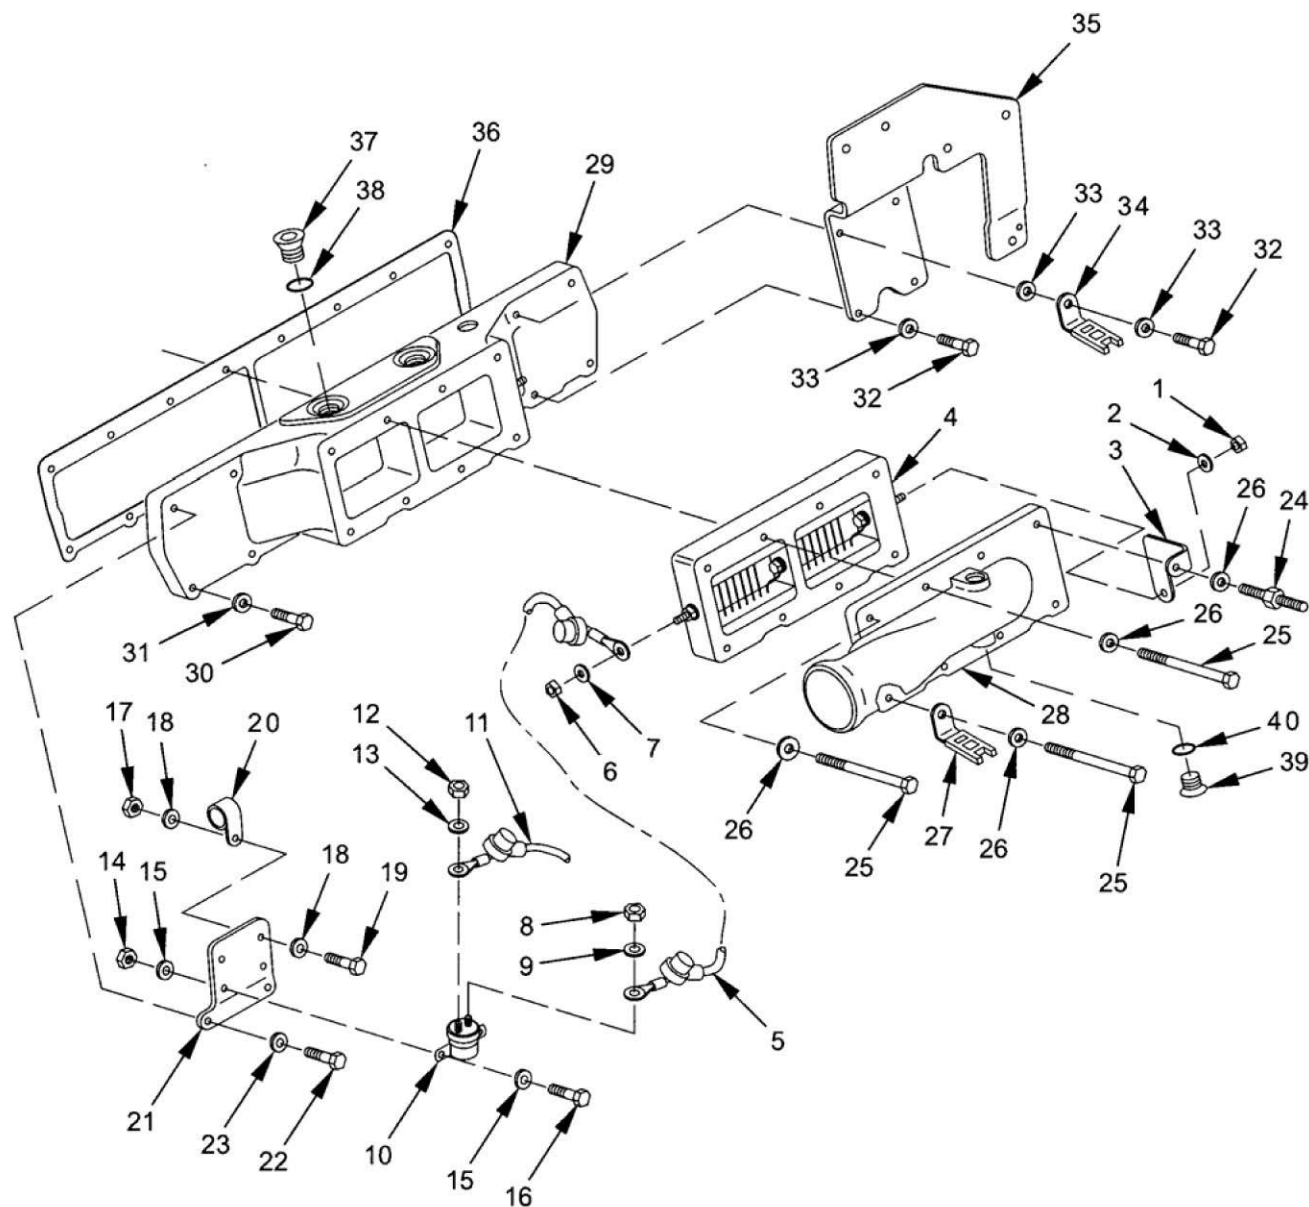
Air Inlet Elbow, Heater, and Manifold Cover.
